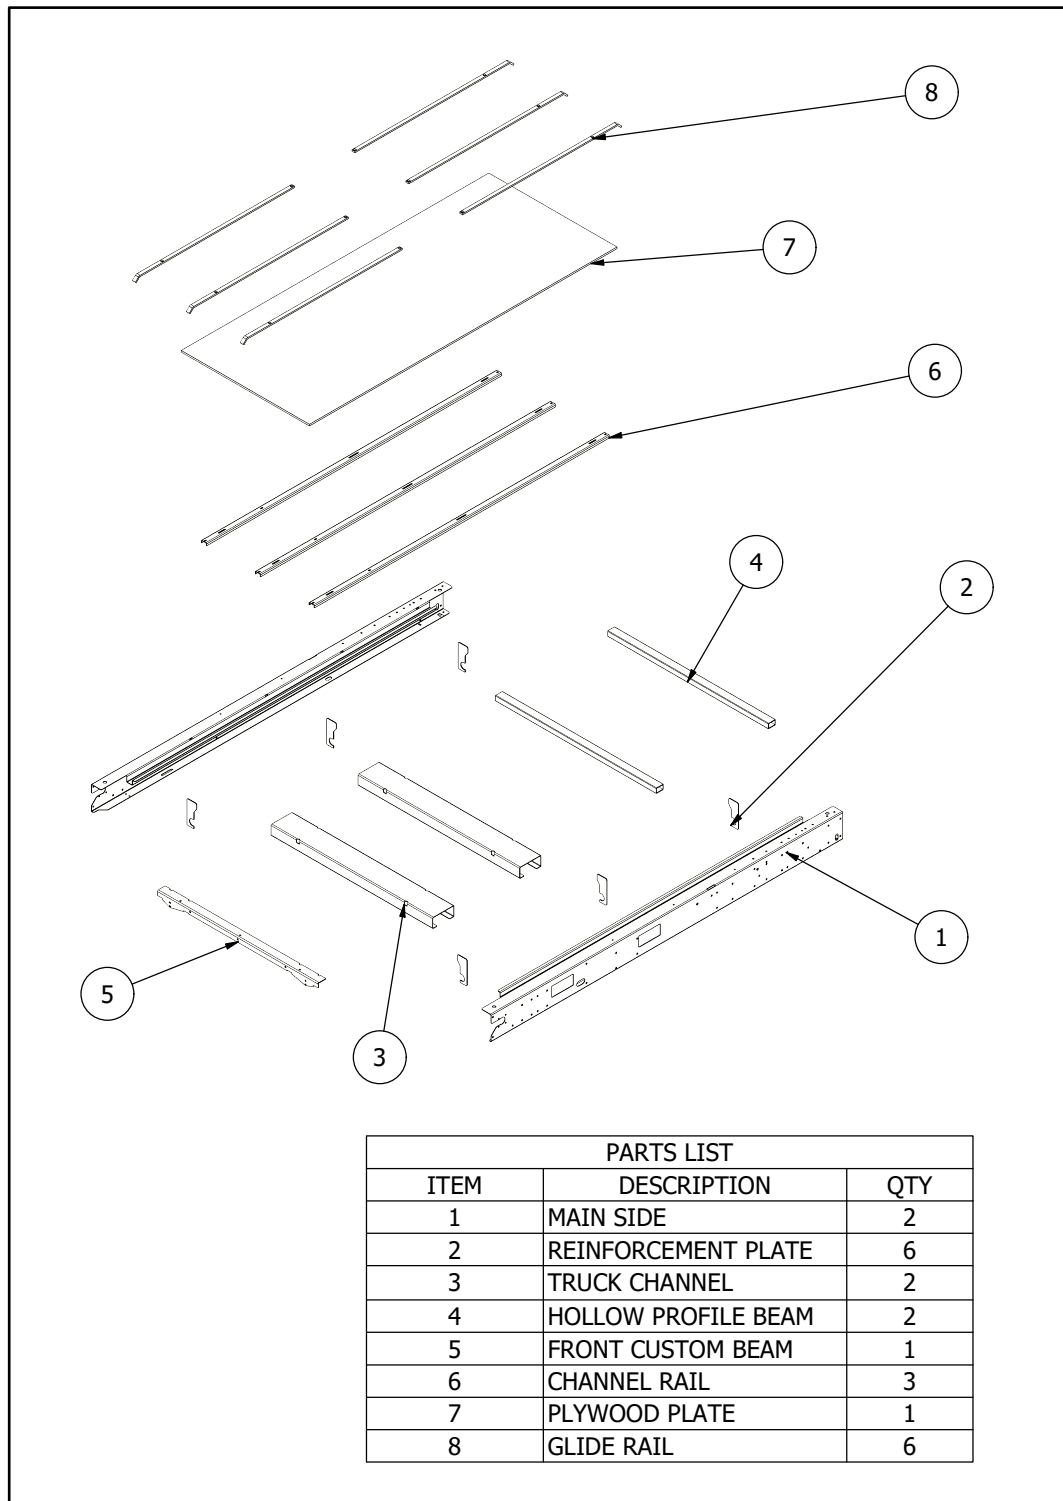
Exploded view with parts list for simplified original frame. Produced in [15].
